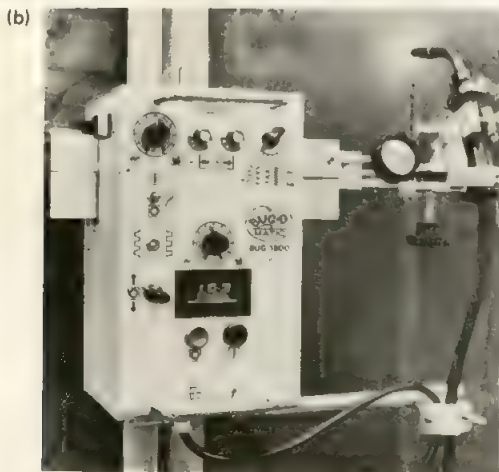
Stiffener welding tractor (two FCAW axis).
